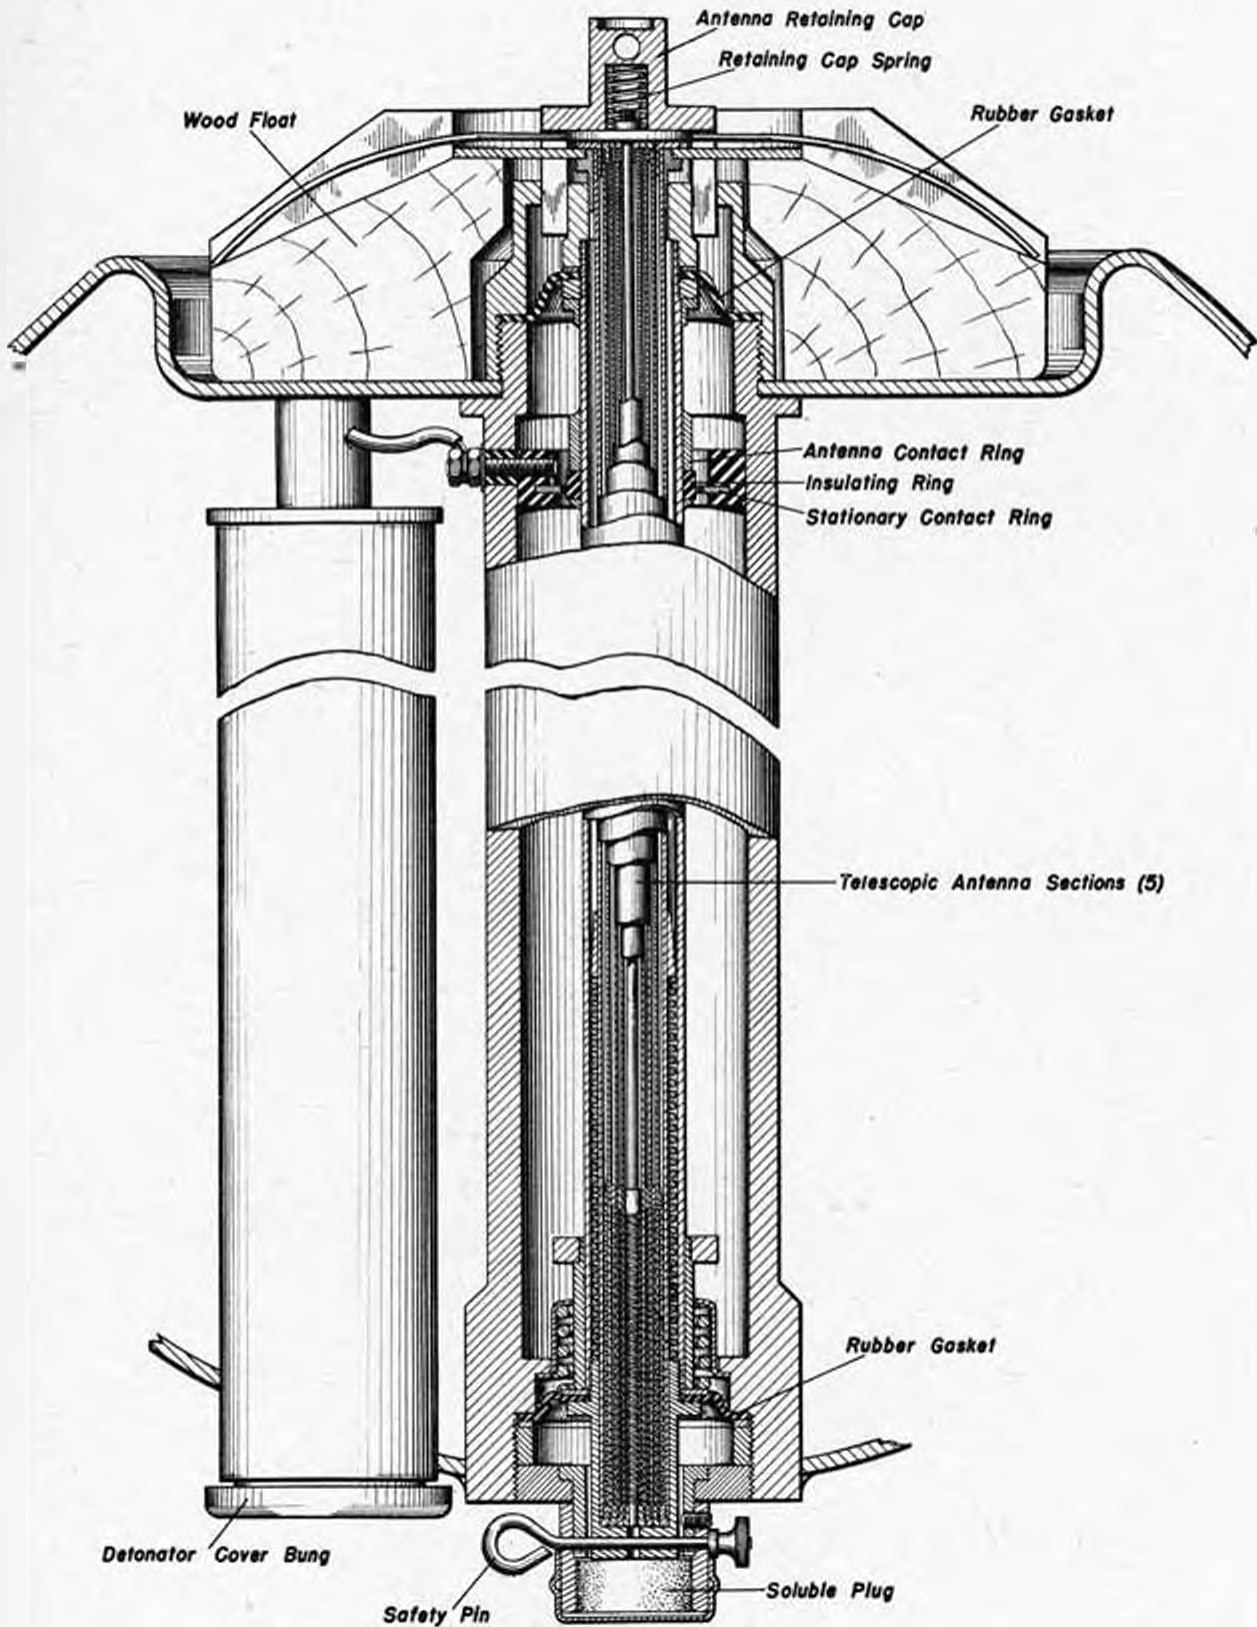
Mine Type GL. Antenna Housing and Release Gear, Sectional View
